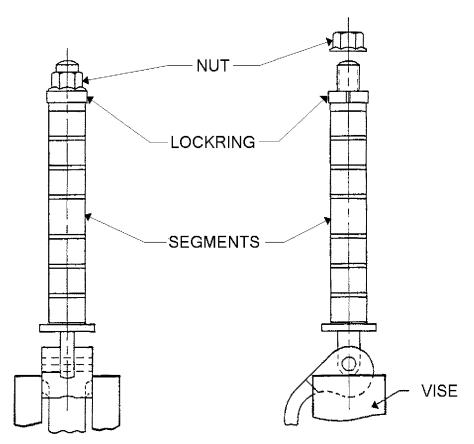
Sheet 1. Use of Expandable Pin Cleaning Tool
